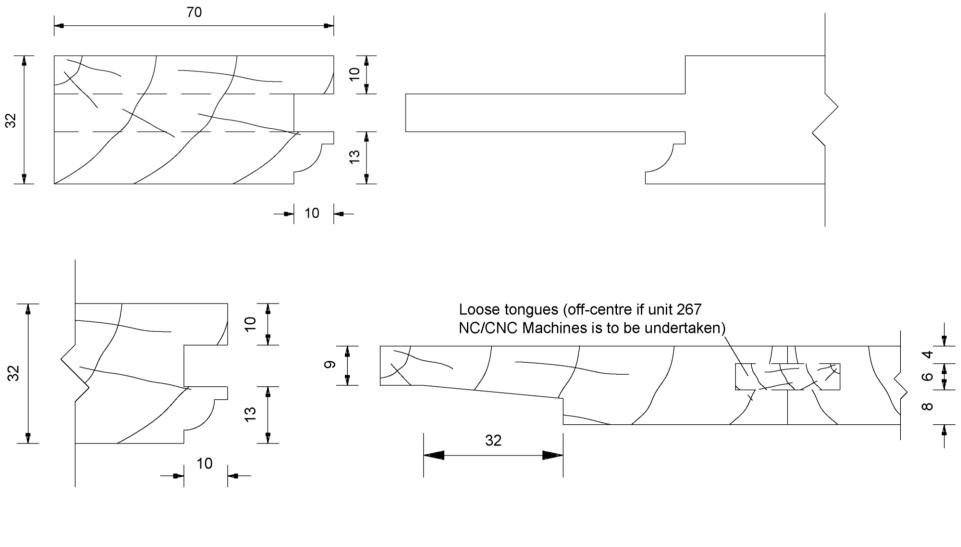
Rail to stile joint detail and raised and fielded panel detail
